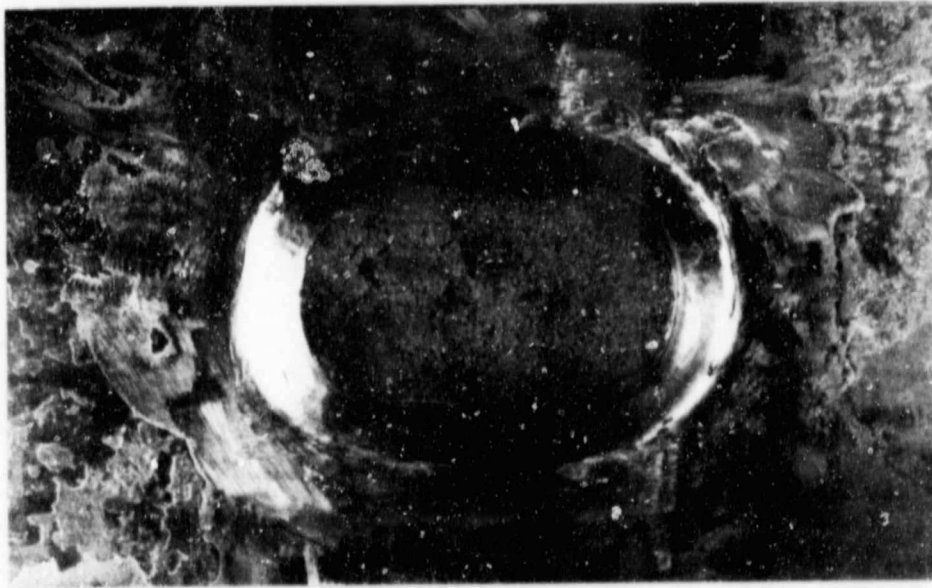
(a) Continuous-type balance pad specimen, with the weld fully ground
